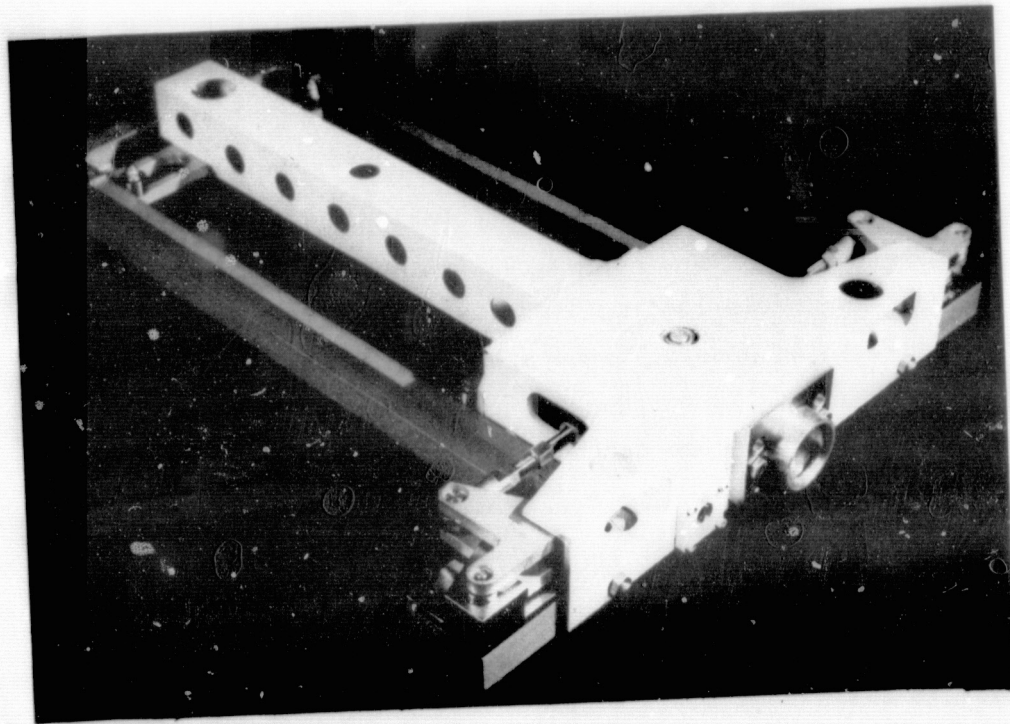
Side-Mounting Interface Mechanism Engineering Test Unit
